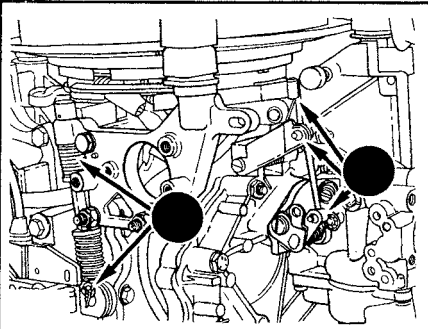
Carburetor linkage, cam and shifter starter lockout greasing points 18-35 hp two cylinder (521cc) Motors
